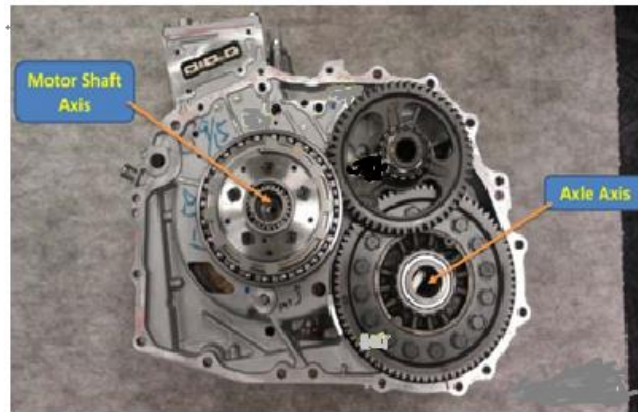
An image of traction motor to wheel axle gear box mechanism [23]
